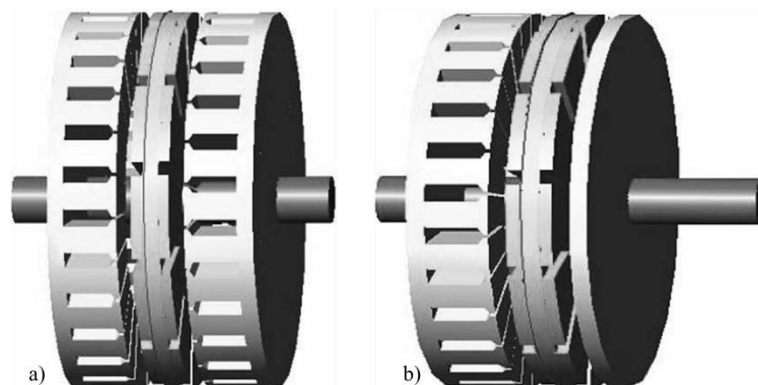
Illustration of a) double stator b) single stator axial-flux machines. [17]
